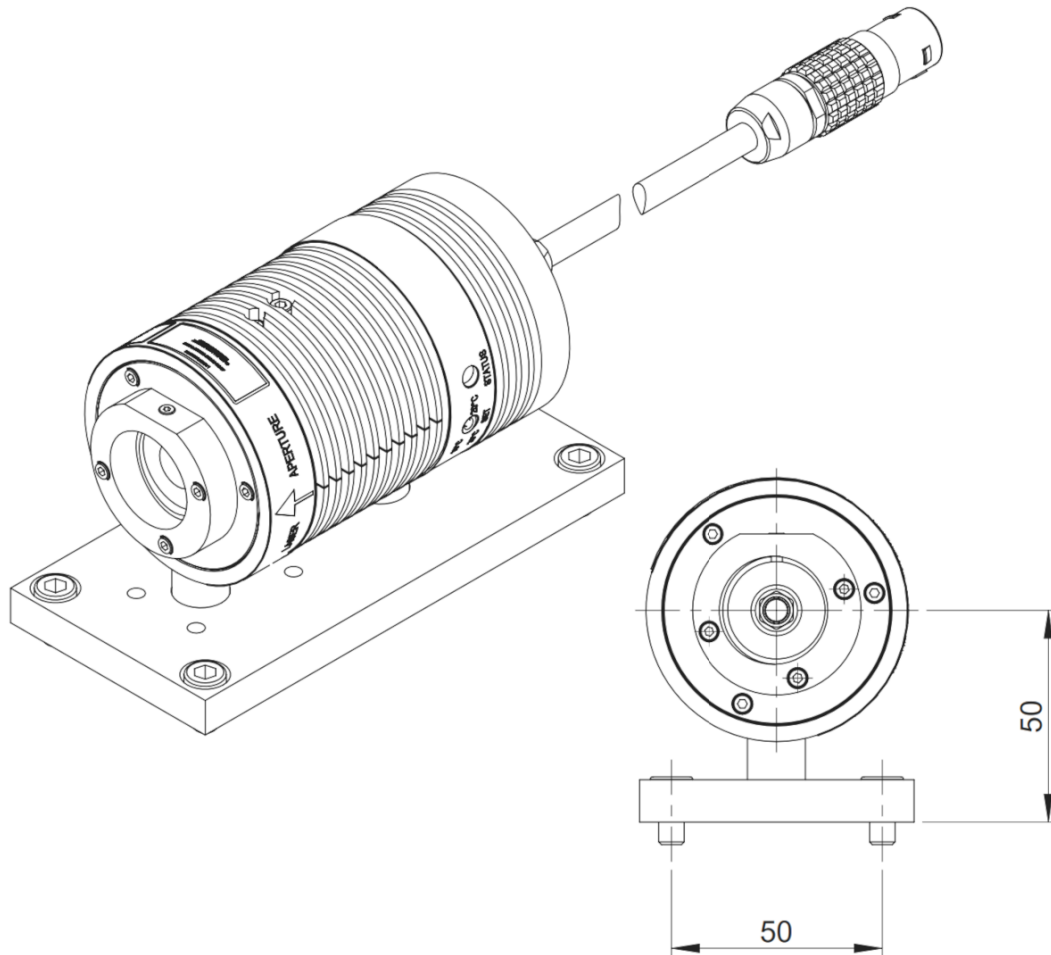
Front view of an LDH laser head with mounting plate and filter holder
